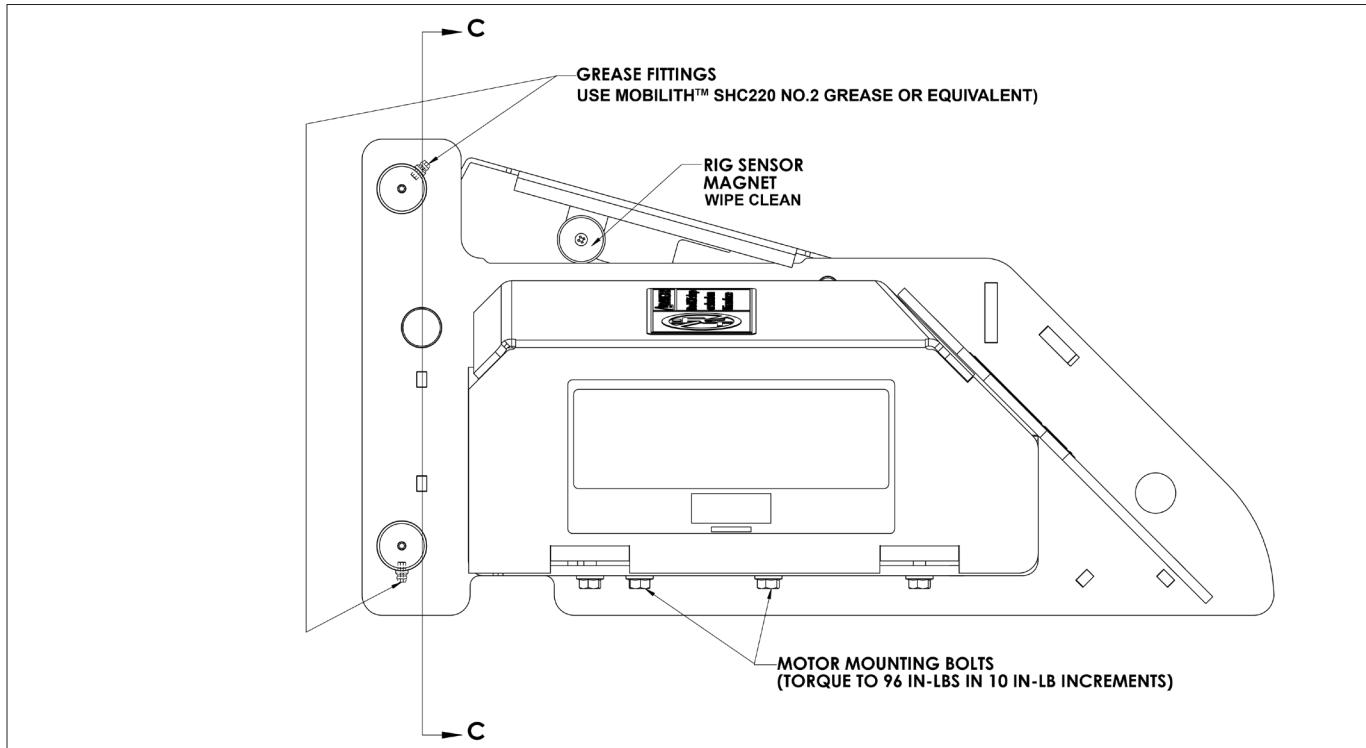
GREASE FITTING, RIG SENSOR MAGNET & MOTOR MOUNTING BOLT LOCATION
